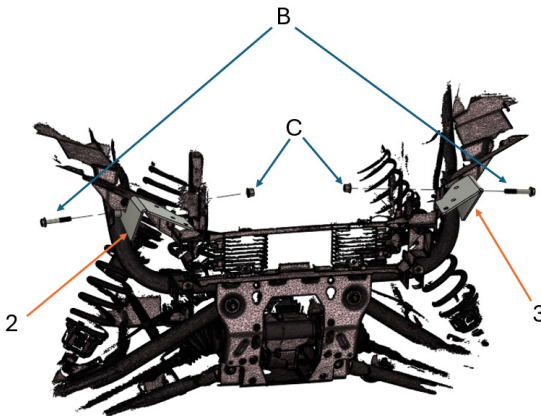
Mount Upper Mount Brackets to the frame using a 15mm Socket and Wrench
